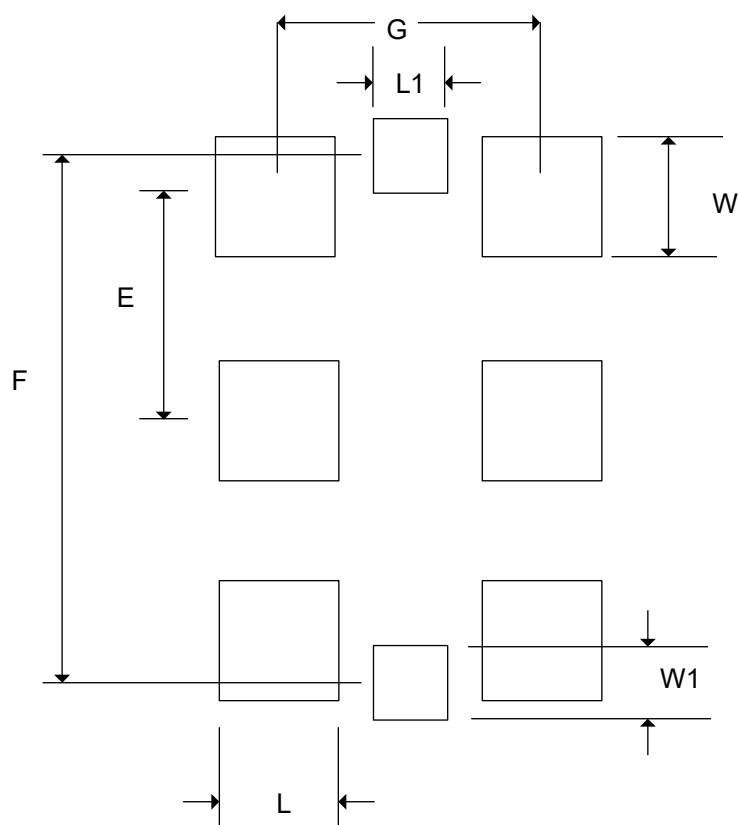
MS1220 Packaging Land Pattern Drawing (3.2mm x 2.5mm)
